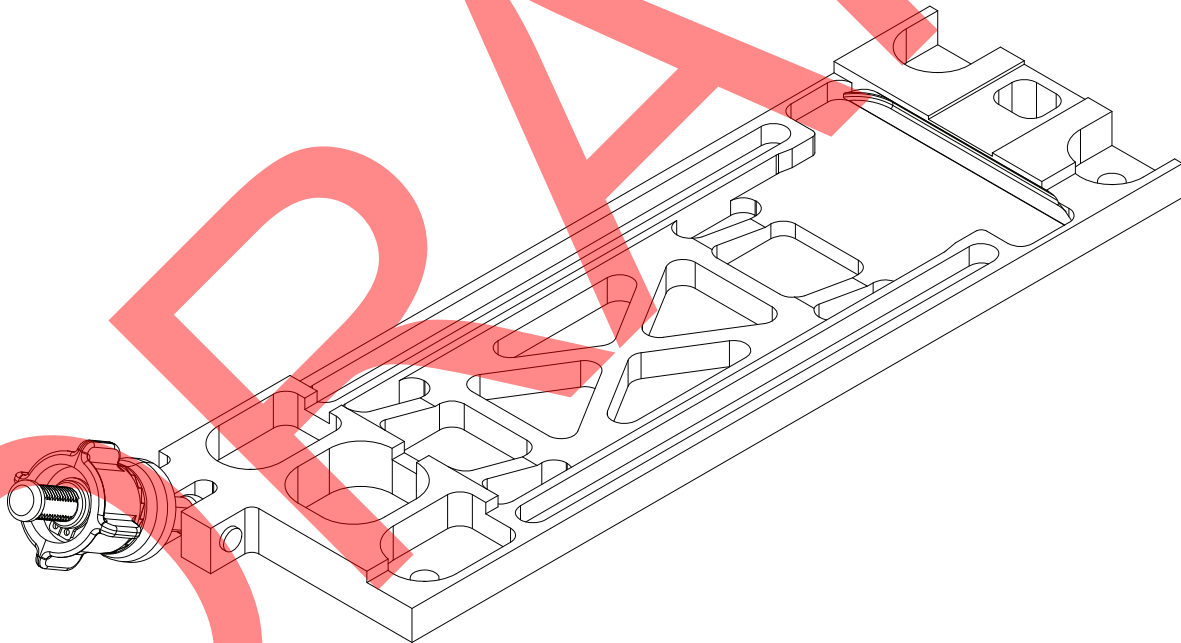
GTX 3000 Stand Rack (011-02515-00)
